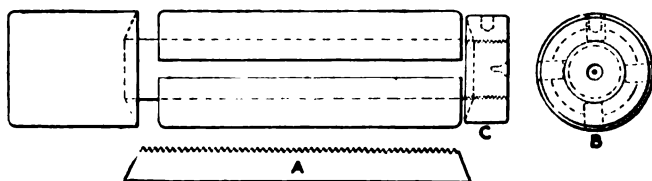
MASTER HOLDER FOR THREADING TAP CUTTERS
